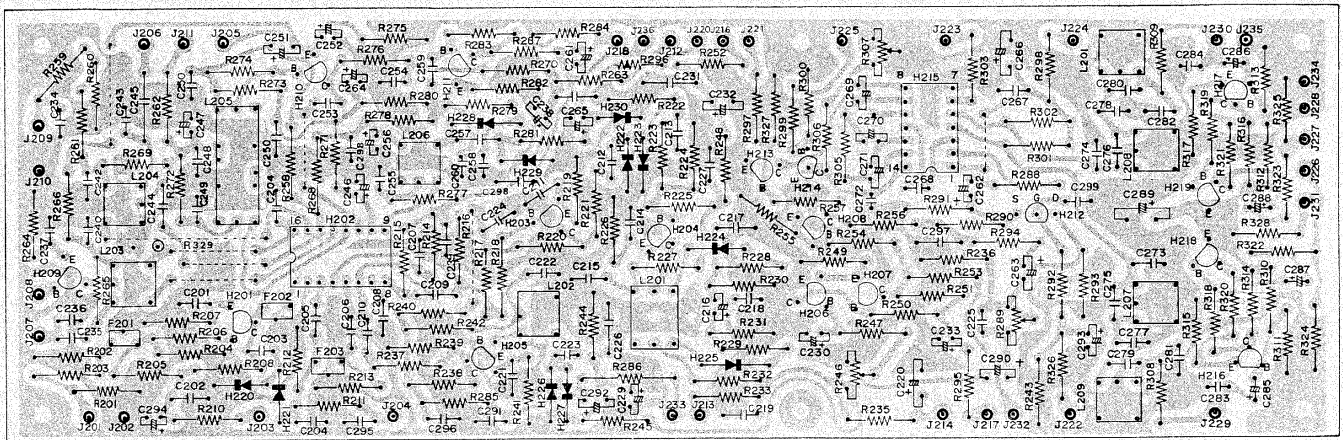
FM/AM Tuner Assembly P200 Component Locations
